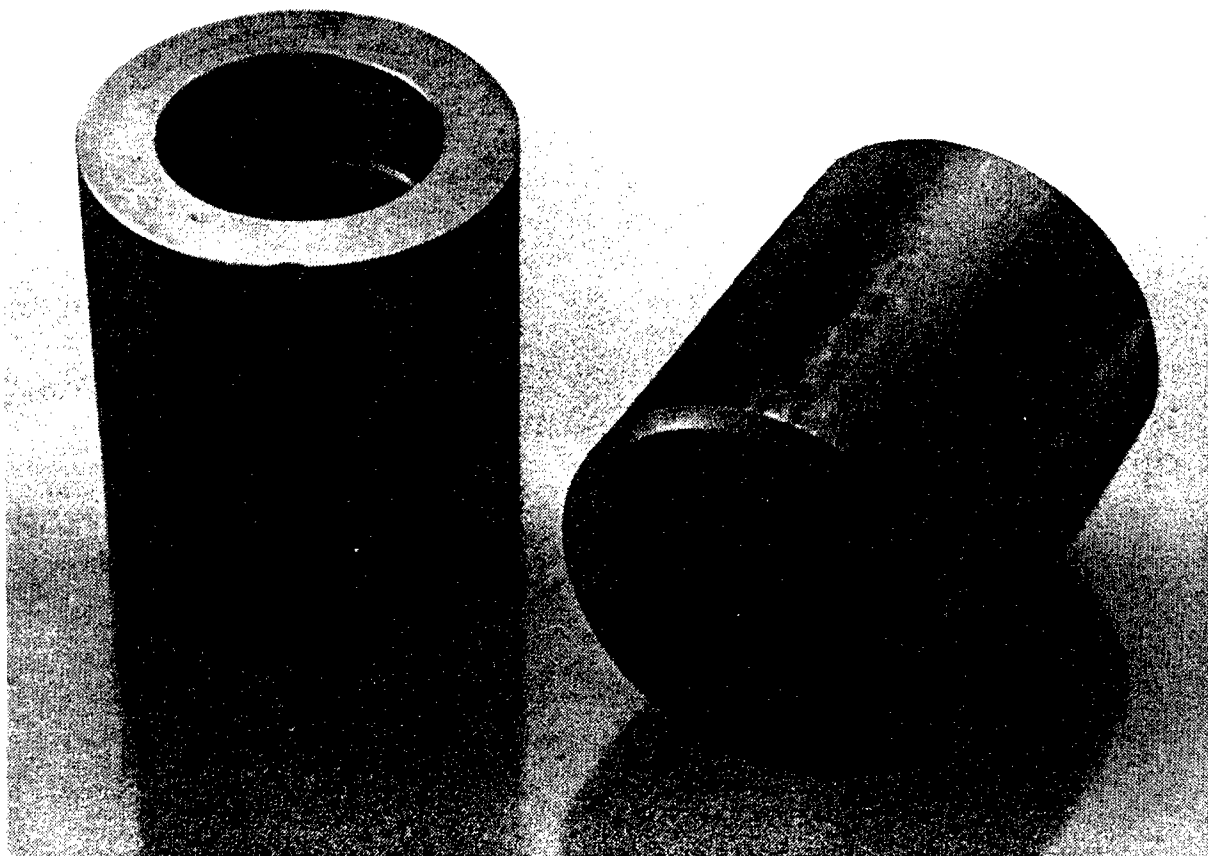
SASC Piston Surface Abrasion (B/N-05)
